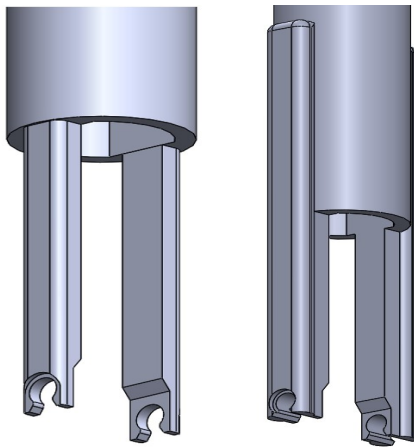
Adjustment of the inner shaft in order to be able to print this prototype. The thickened beam prevents it from bending and breaking when a force is exerted on it
